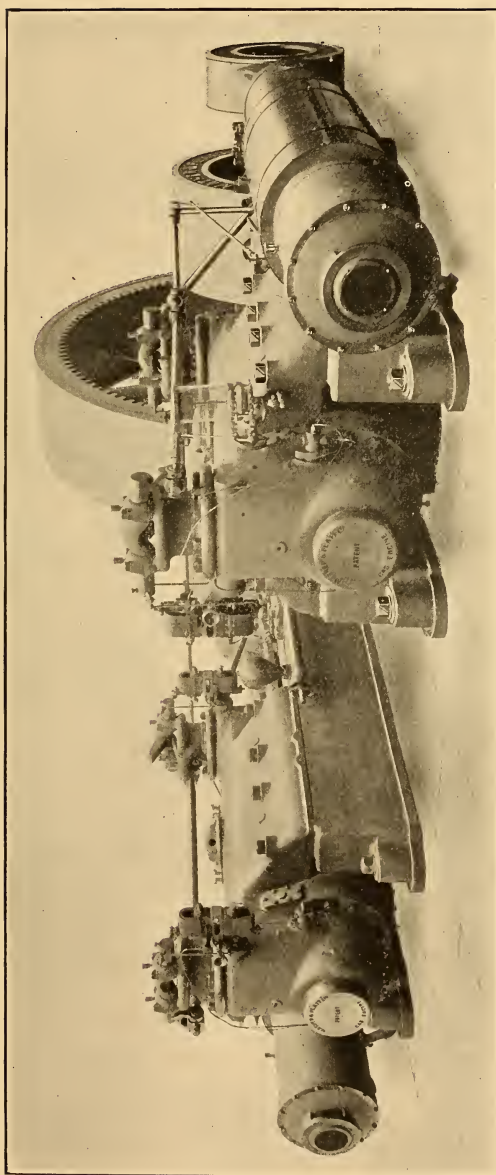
700 B.H.P. Koerting Gas Engine with grooved flywheel for rope-driving (Mather and Platt).
